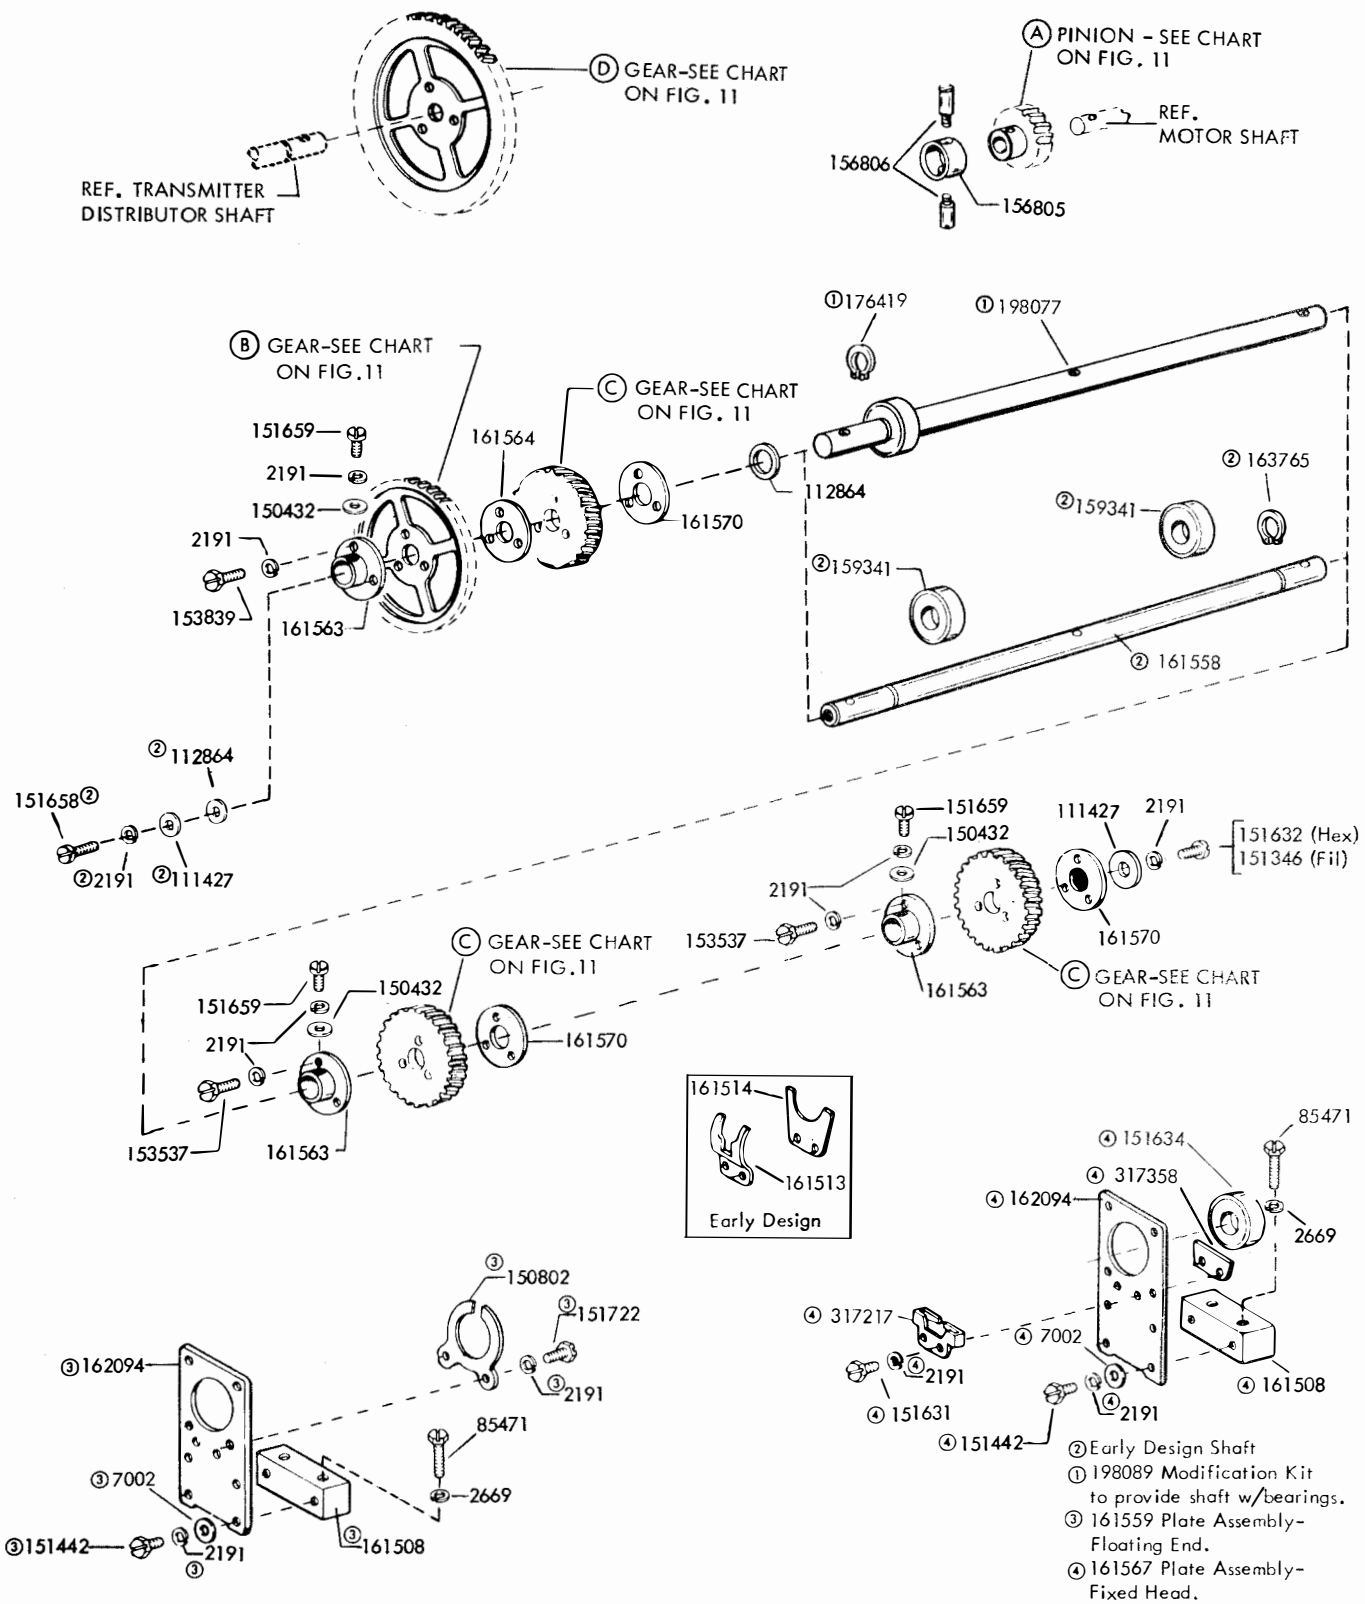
DRIVING SHAFT MECHANISM - MULTIPLE MOUNTED UNIT
